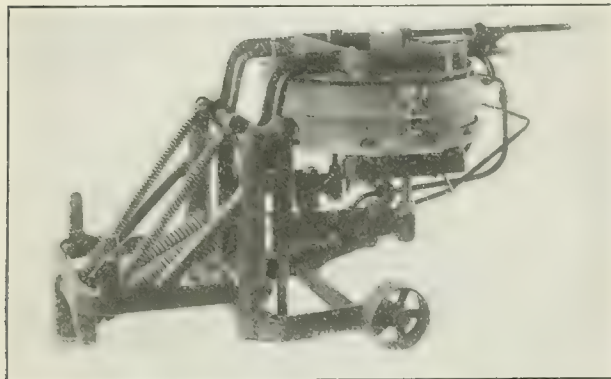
Pridmore Molding Machine with Flask Rolled Over Ready to Draw Mold.
